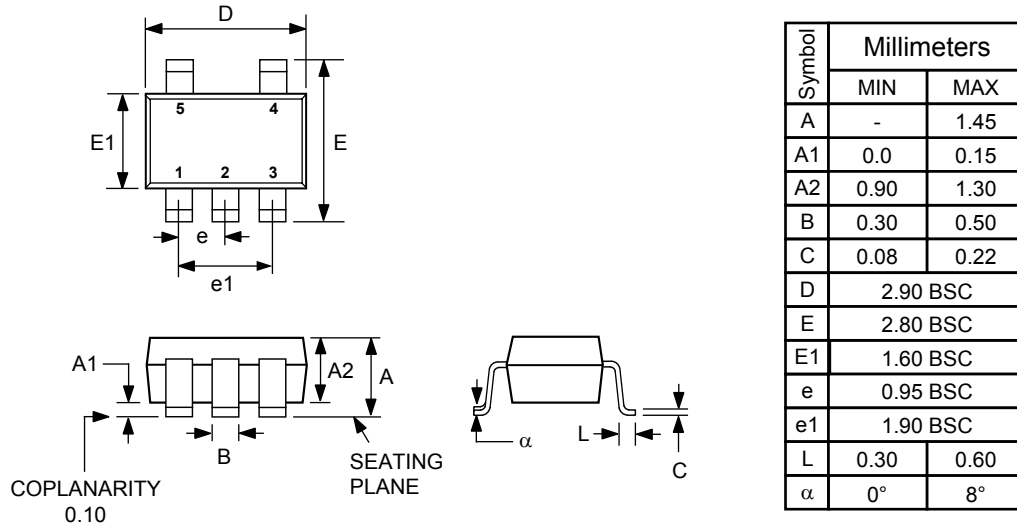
Physical dimensions, 5-lead SOT-23 package
